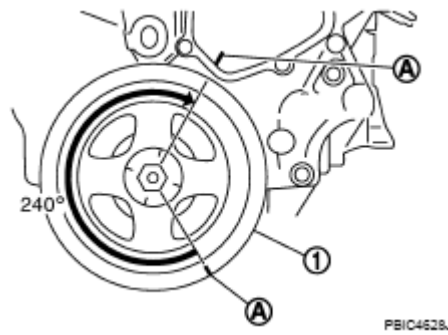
Identifying Matching Marks On Crankshaft Pulley
